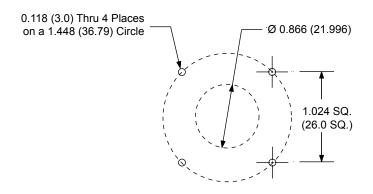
MDrive 14 linear actuator mounting and drill pattern
